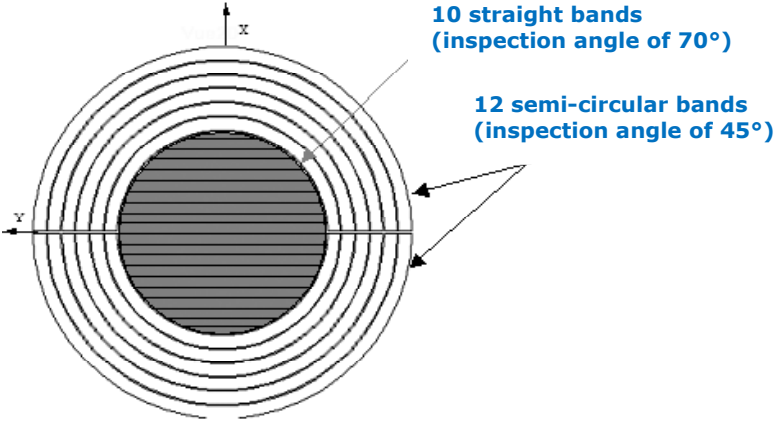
Phased array probe used to inspect edge-to-edge welds in the main reactor vessel.
